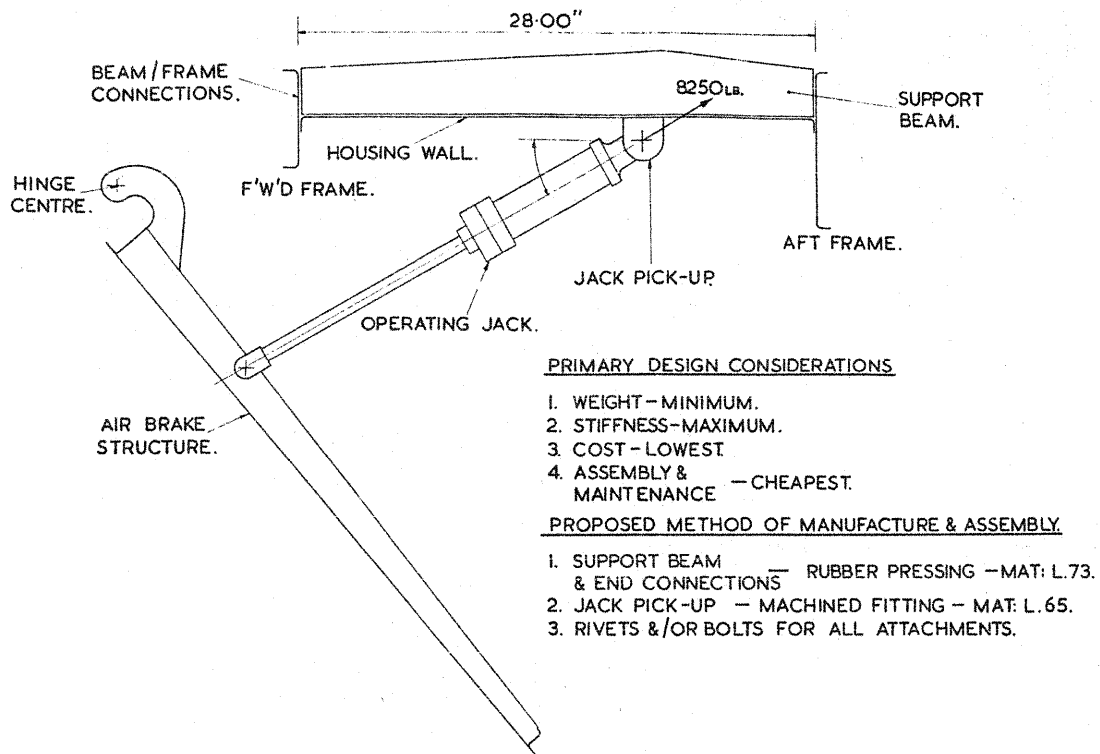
SIMPLIFIED DRAWING OF 1st TERM EXAMPLE
